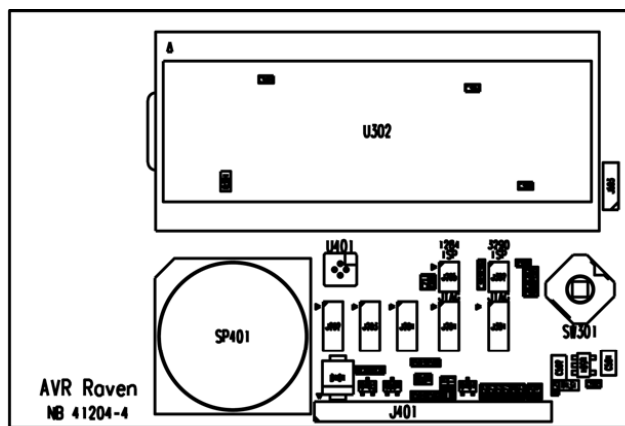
Assembly drawing AVRRAVEN - back view.
